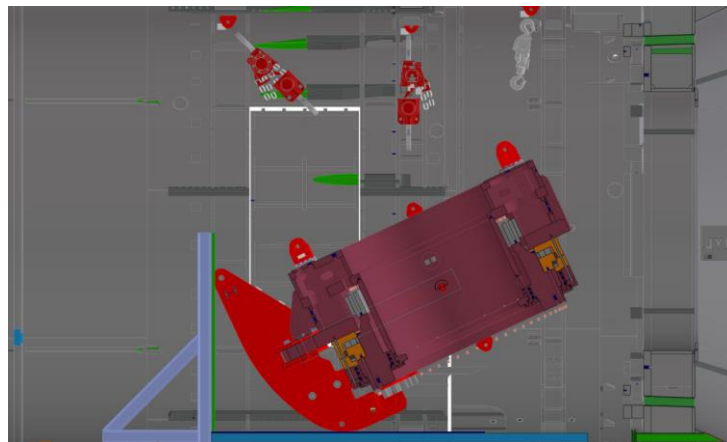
Tilt maneuver for the main drive ("Investigation Main Drive Disassembly", Herrenknecht, 2022)
